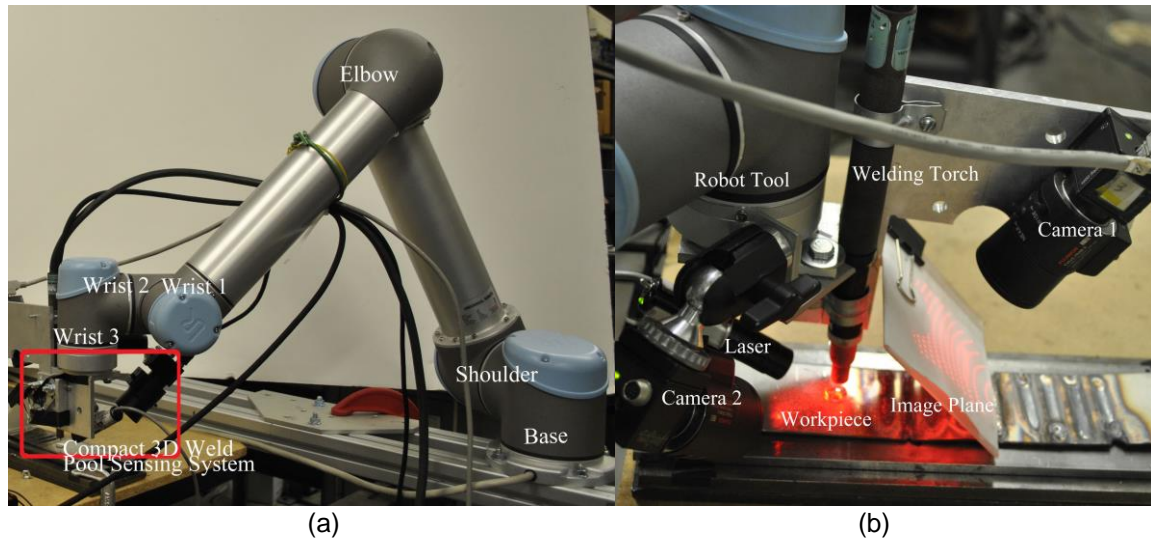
UR-5 robot arm and sensing system (a) UR-5 robot arm with compact 3D weld pool surface sensing system attached to the robot tool (b) Detailed view of the compact sensing system.
